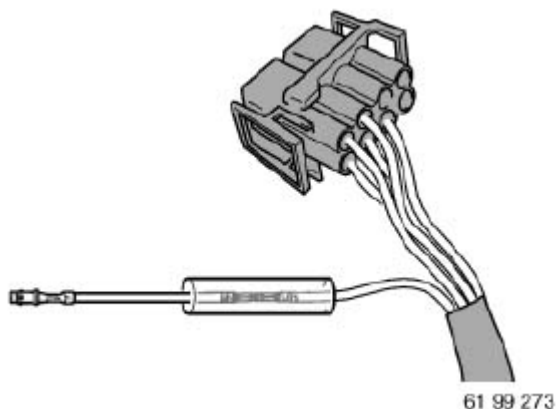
Identifying Shrink-On Sleeve Over Butt Connector
